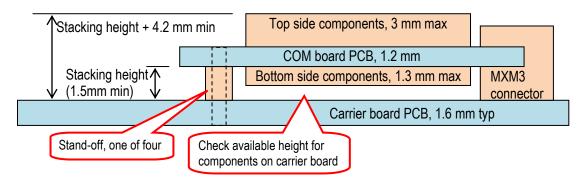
COM Board Mounting in MXM3 Connector, Stacking Height
